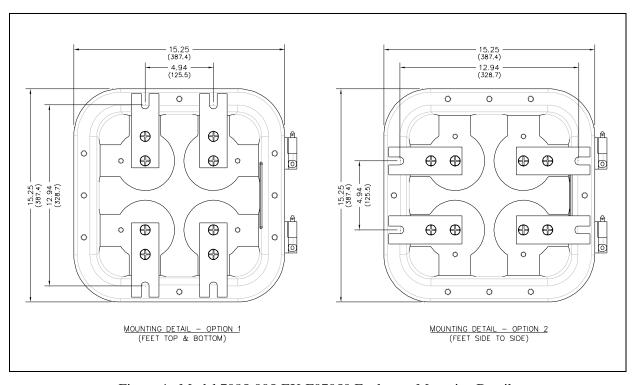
Model 7085-005-EX-F07050 Enclosure Mounting Details
